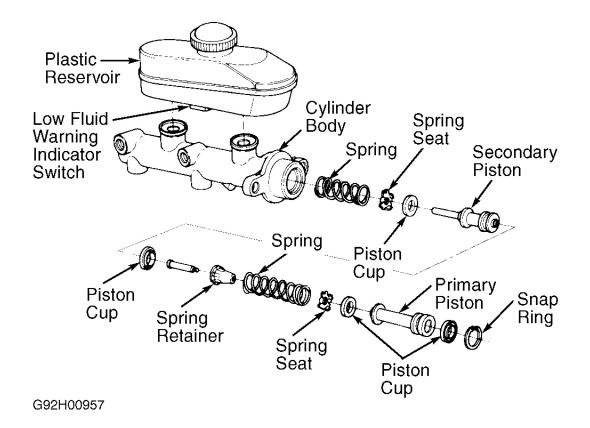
Exploded View Of Master Cylinder (B2300, B3000 & B4000) Courtesy of MAZDA MOTORS CORP.
